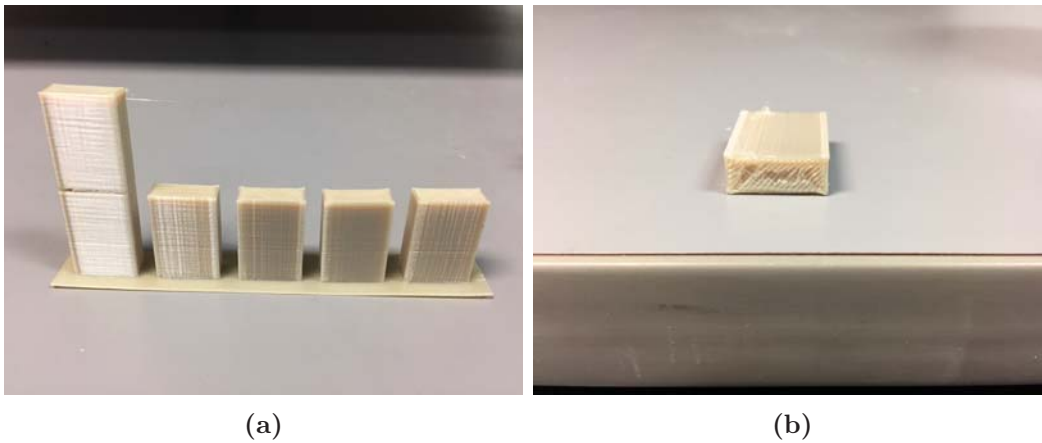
(a) Lower half printed before the pause with normal air gap. Only one top half remained attached at the end of the print. (b) One of the top halves from the failed print. The layer making up the joint between the two parts did not make a strong bond and came off later in the print.
